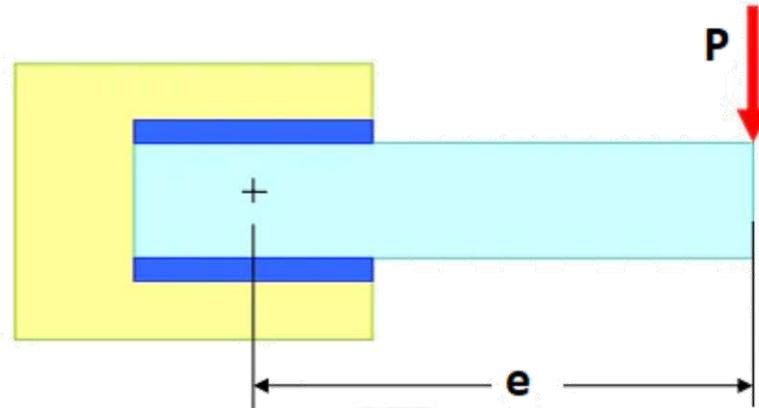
Eccentric loaded weld joint – Type I
